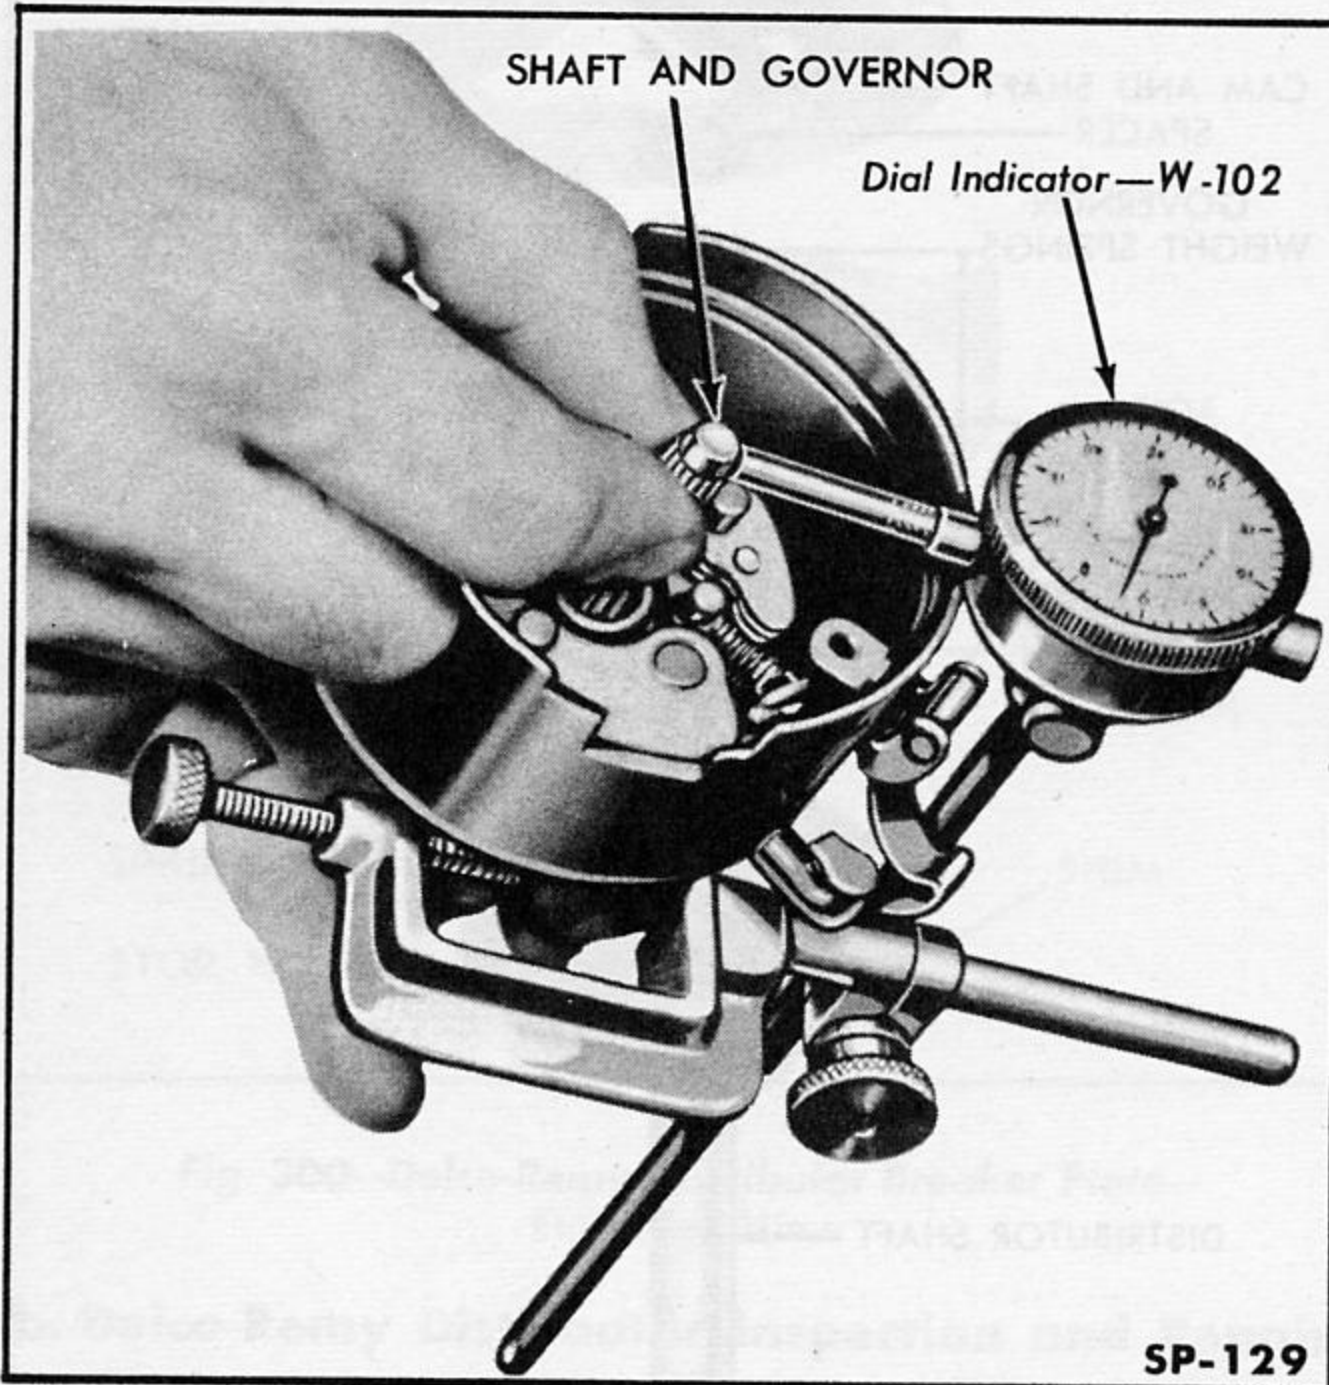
Checking Auto-Lite Distributor Shaft Side Play
